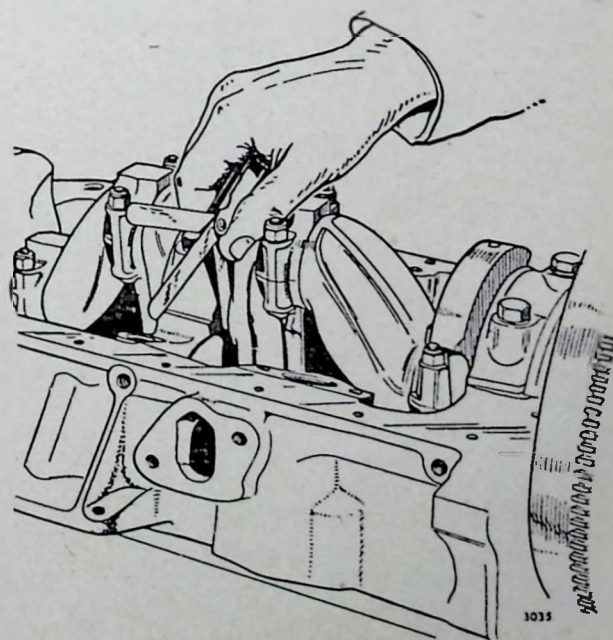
Checking the crankshaft end float (O.H.V. engine).
